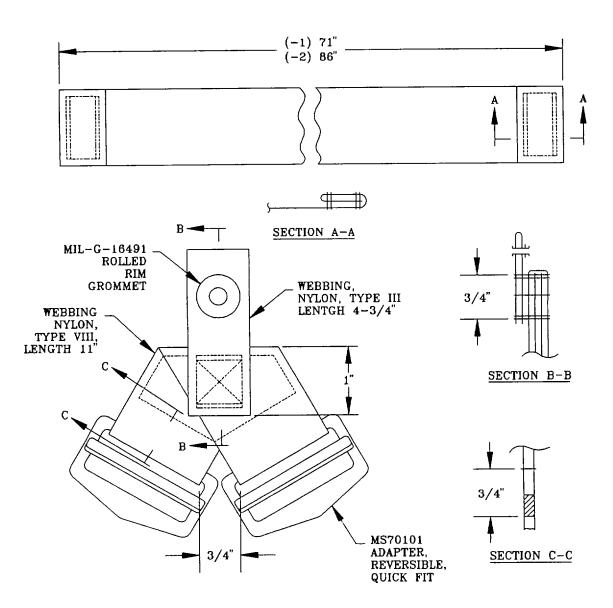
(Container Front Mounted) Vertical Restraint Assembly (Sheet 3 of 3)
